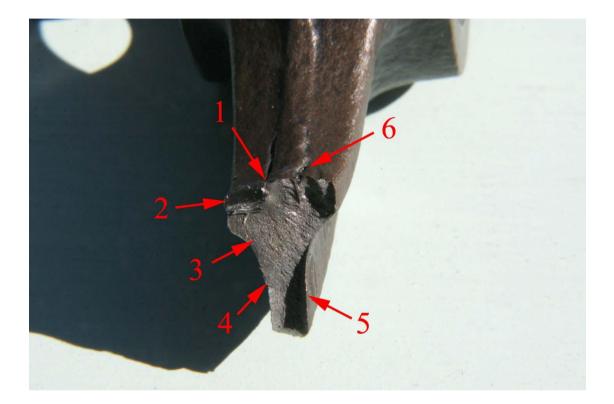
Main arm fracture surface viewed inverted and in the axial direction. Arrow 1 indicates an axial groove along one side of a mould joint line. Arrow 2 indicates the region of smeared metal. Arrow 3 indicates a lightly tarnished area containing fatigue crack growth striations. Arrow 4 indicates the transition between lightly tarnished and brighter fracture surface. Arrow 5 indicates the shear lip. Arrow 6 indicates another axial groove along the other side of the mould joint line.
